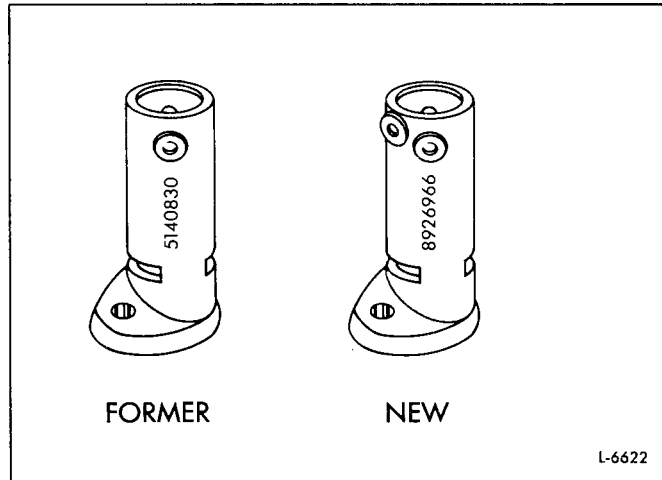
Former and New Lube Oil Pressure Regulator Valve Bodies
